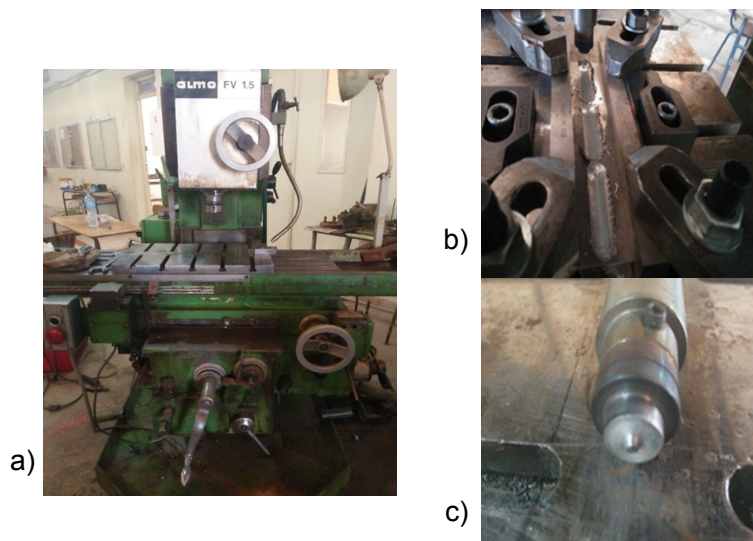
a) Friction stir welding machine, b) the clamping devices and work-pieces with welds, c) welding tool
